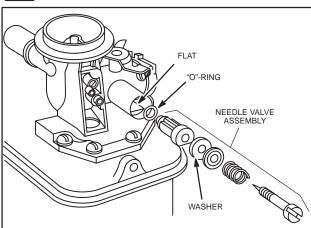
NEEDLE VALVE ASSEMBLY, PRESSED-IN-TYPE
